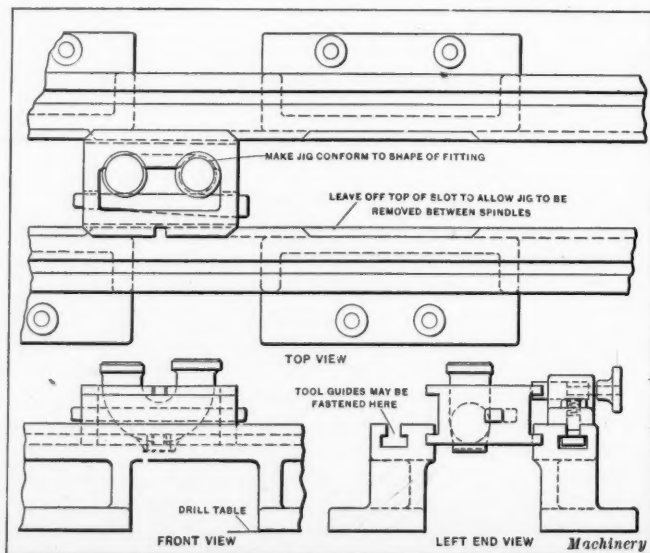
Section of Fixture used on Machines shown in Fig. 1
